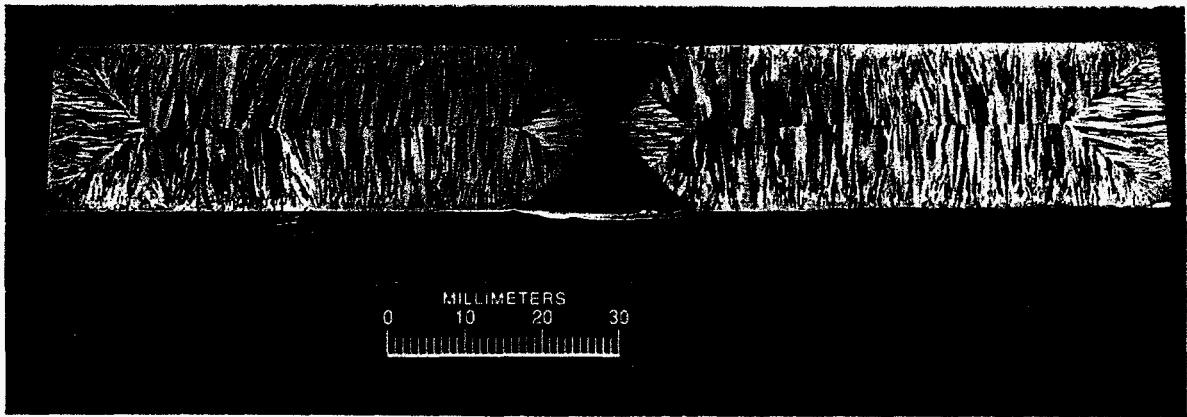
Macroetched cross section of 25-mm-thick IC-221M plates welded together with IC-221LA filler metal.
